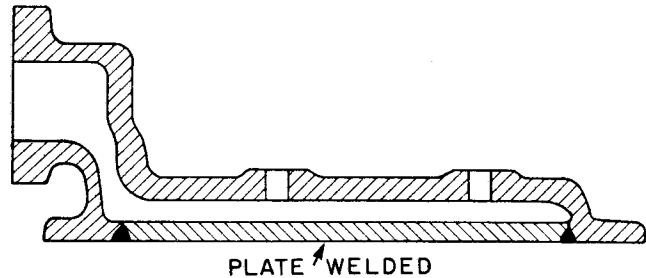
Cast-weld design replaces a costly cored design that is difficult to clean.
